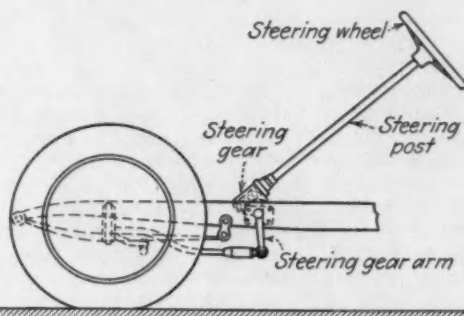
Reducing gear placed between driver's hands and the wheels, was first step in trying to lessen the effort required to steer.
